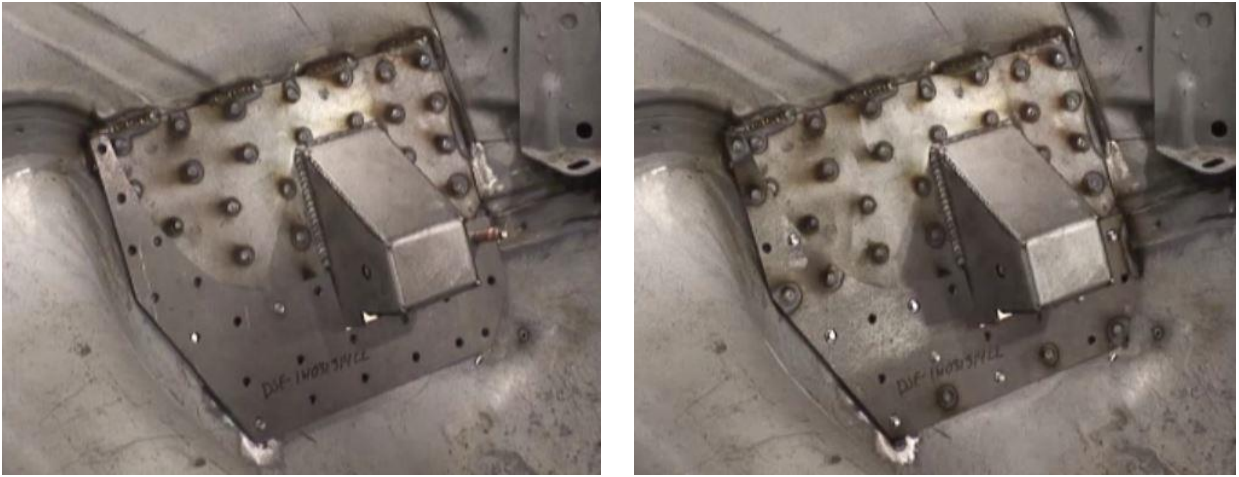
Plug Weld Lower Doubler Plate
